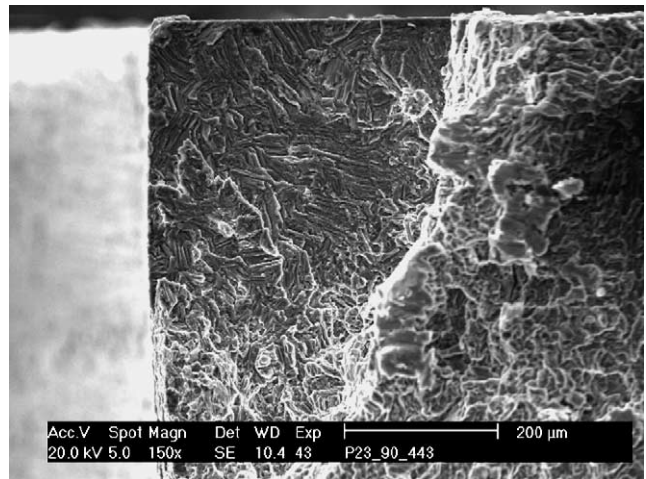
Image of Crack 1 (corner crack in the upper left) on the fracture surface of Sample 1.
